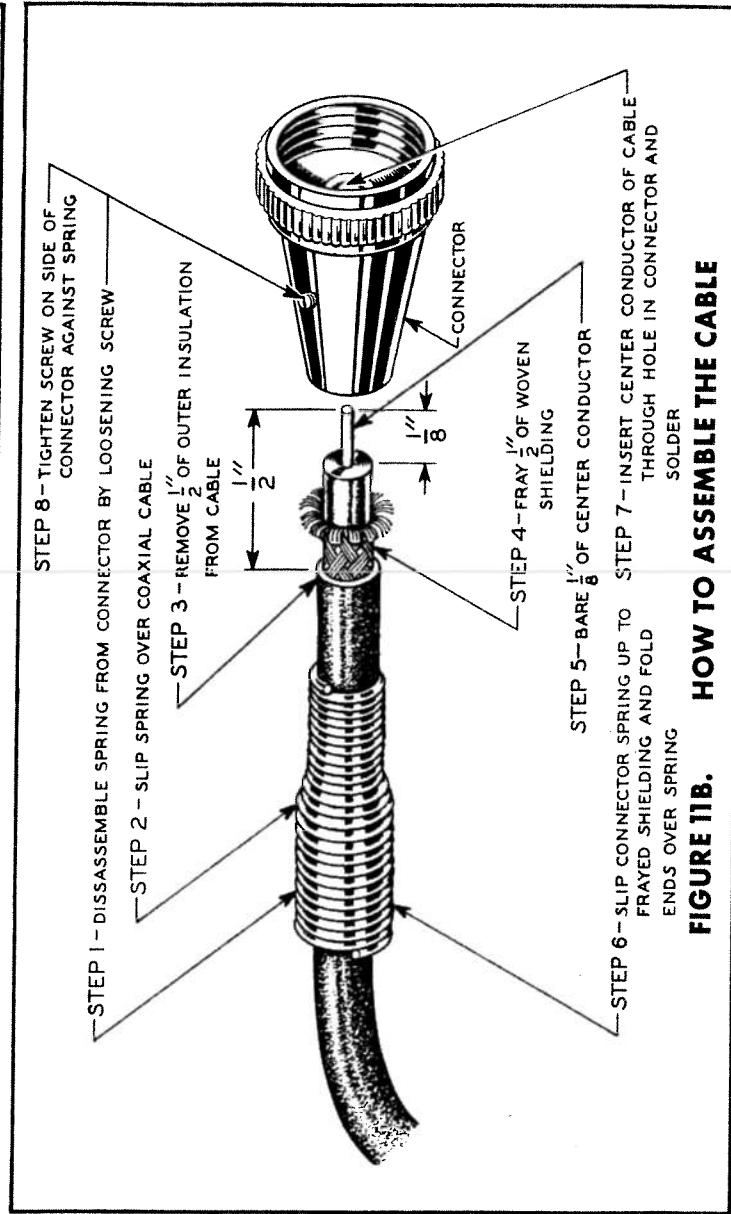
B. HOW TO ASSEMBLE THE CABLE
